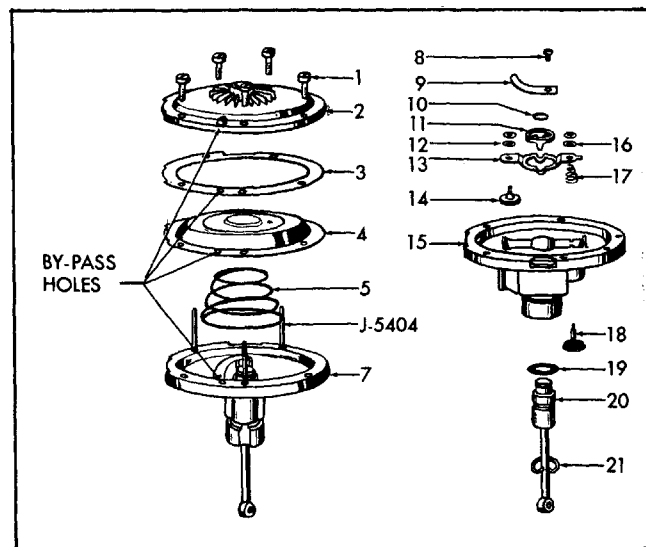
Replacement of Push Rod and Plunger, Poppets, Diaphragm, and Front Piston Plate
